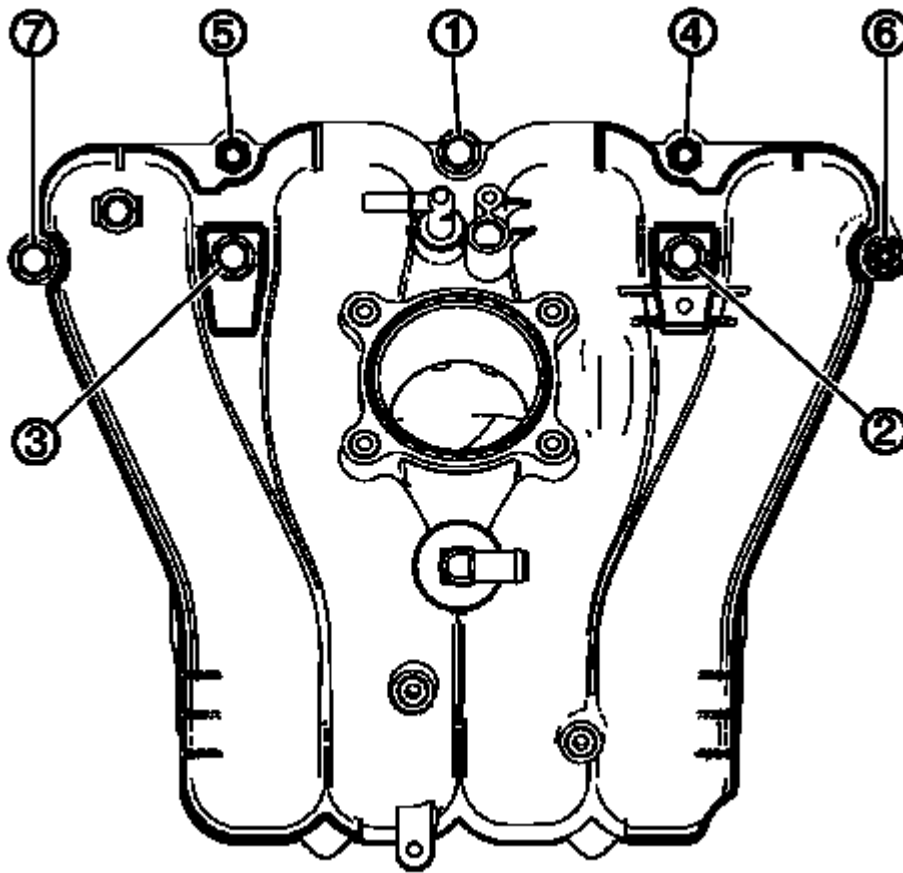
Identifying Intake Manifold Bolts And Nuts
